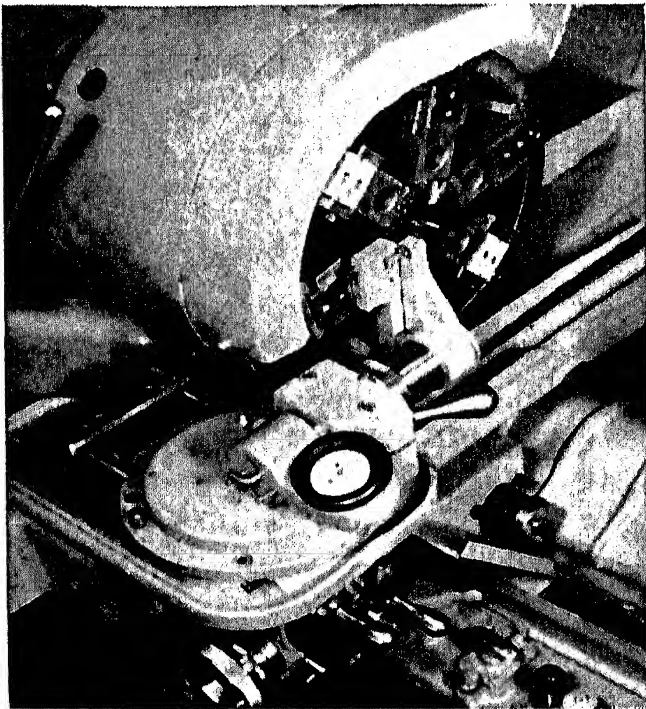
A manually operated sizing device on an internal grinder. The workpiece is a gear located on its pitch line by pins in a sliding jaw chuck. (Courtesy Bryant Chucking Grinder Co.)
